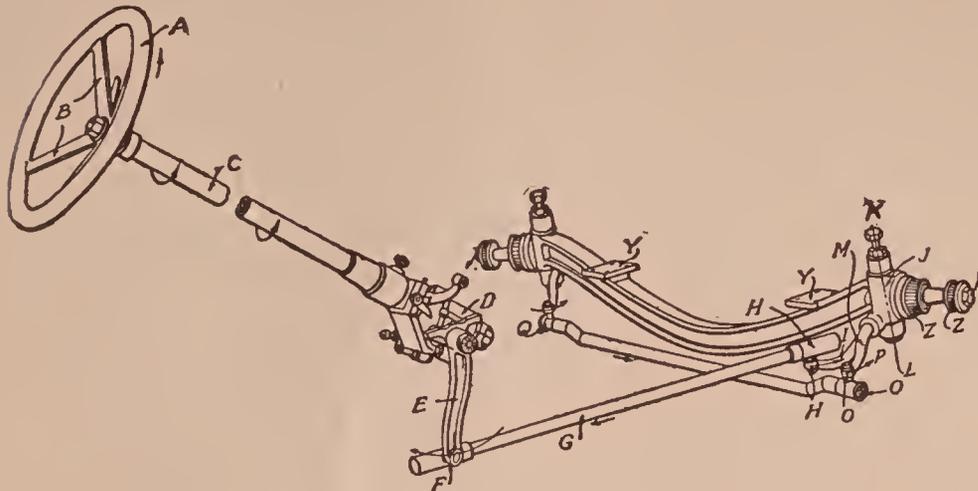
Steering gear of the Pierce-Arrow car, showing how this is connected with the front axle and how the various parts work.
